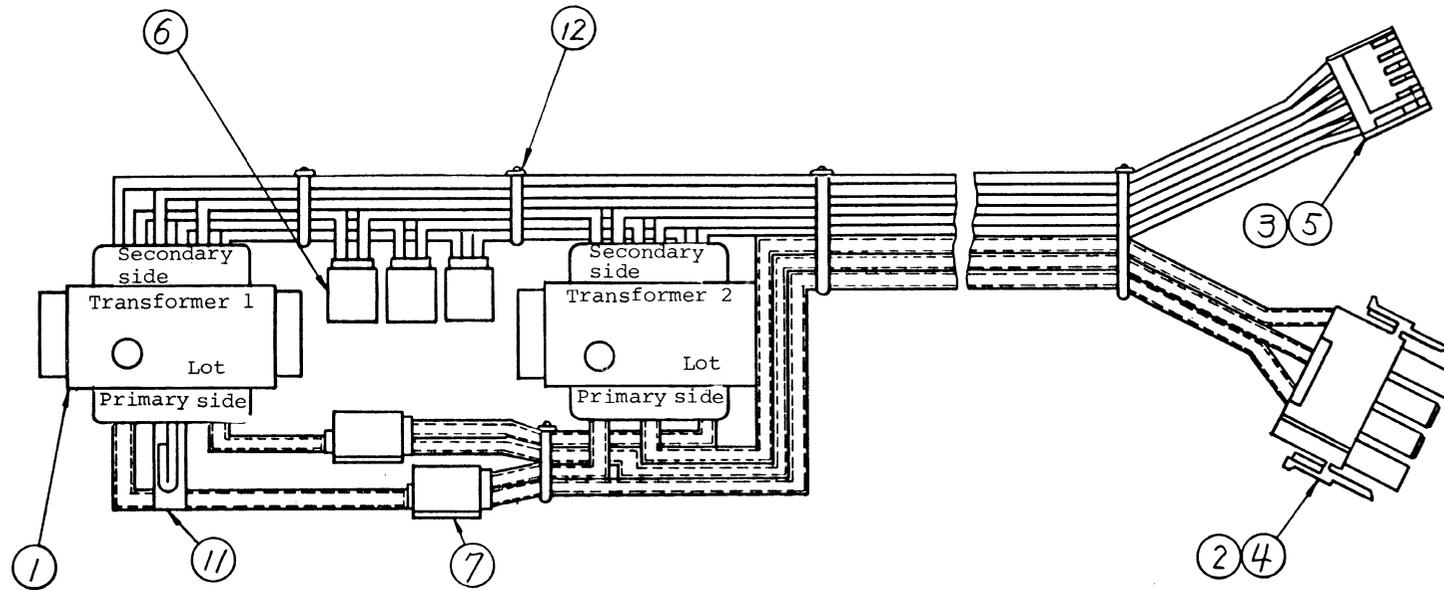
Transformer Assembly (2LR-192189-2) (for USA)
